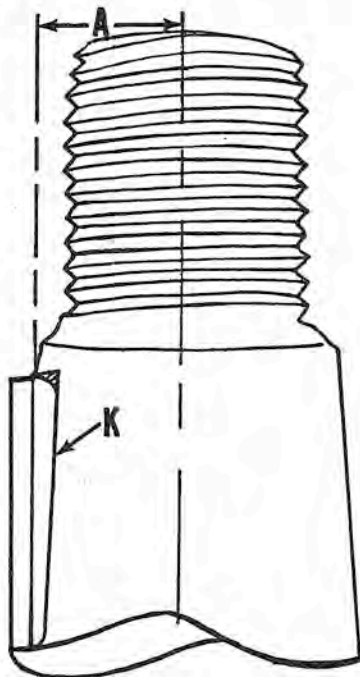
When installing flywheel, make sure outer edge of key (K) is parallel with centerline of crankshaft as shown at (A).
